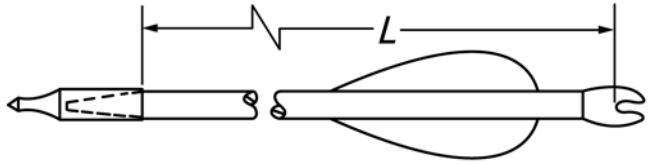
Arrow Assembly Having the Front End of the Shaft Tapered or Swaged (See 2.1.2.2)
